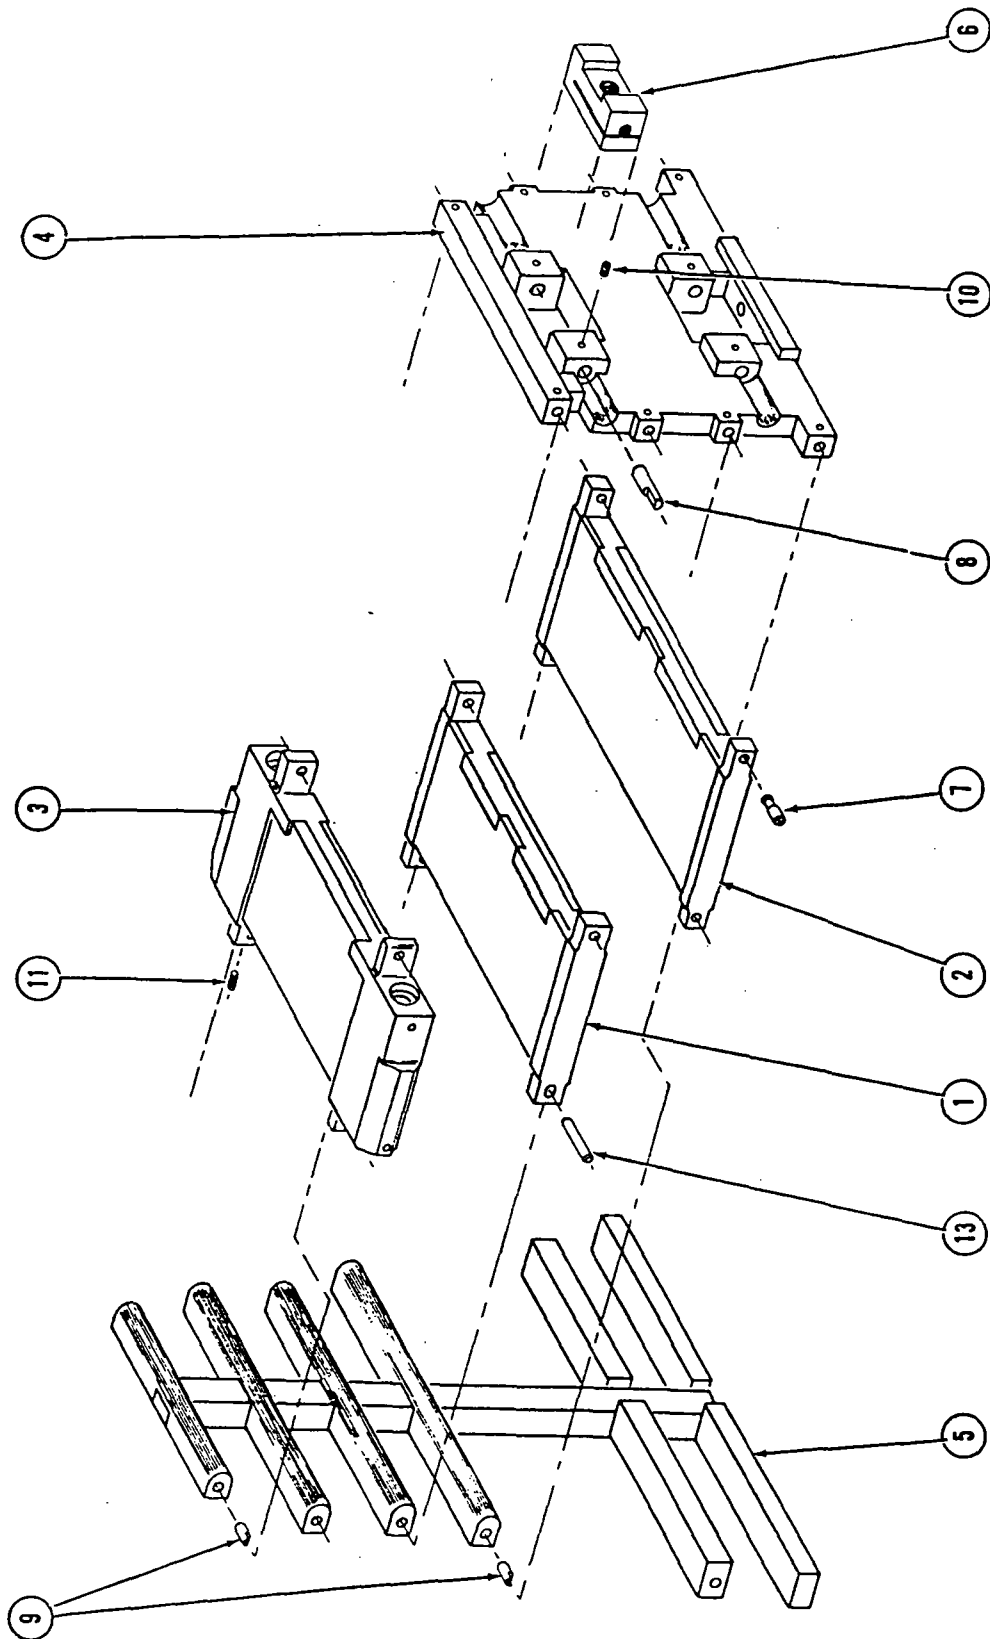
REAR PLATE ASSEMBLY - Part No. 182277A
